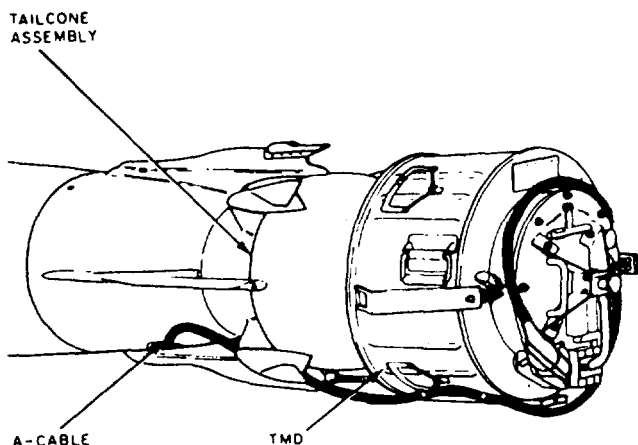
Torpedo mounted dispenser (TMD) attached to a Mk 48 torpedo.
